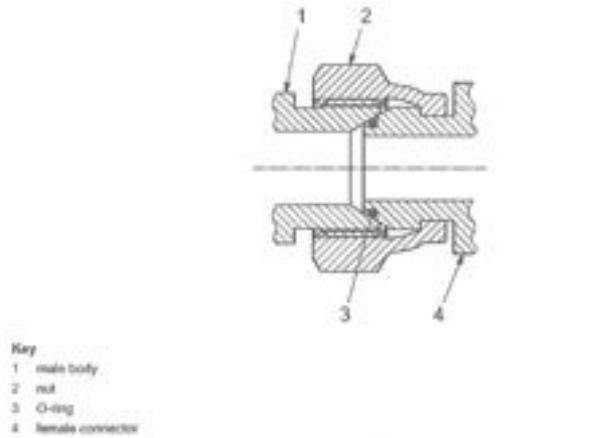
Cross-section of typical 60° cone connector with O-ring
